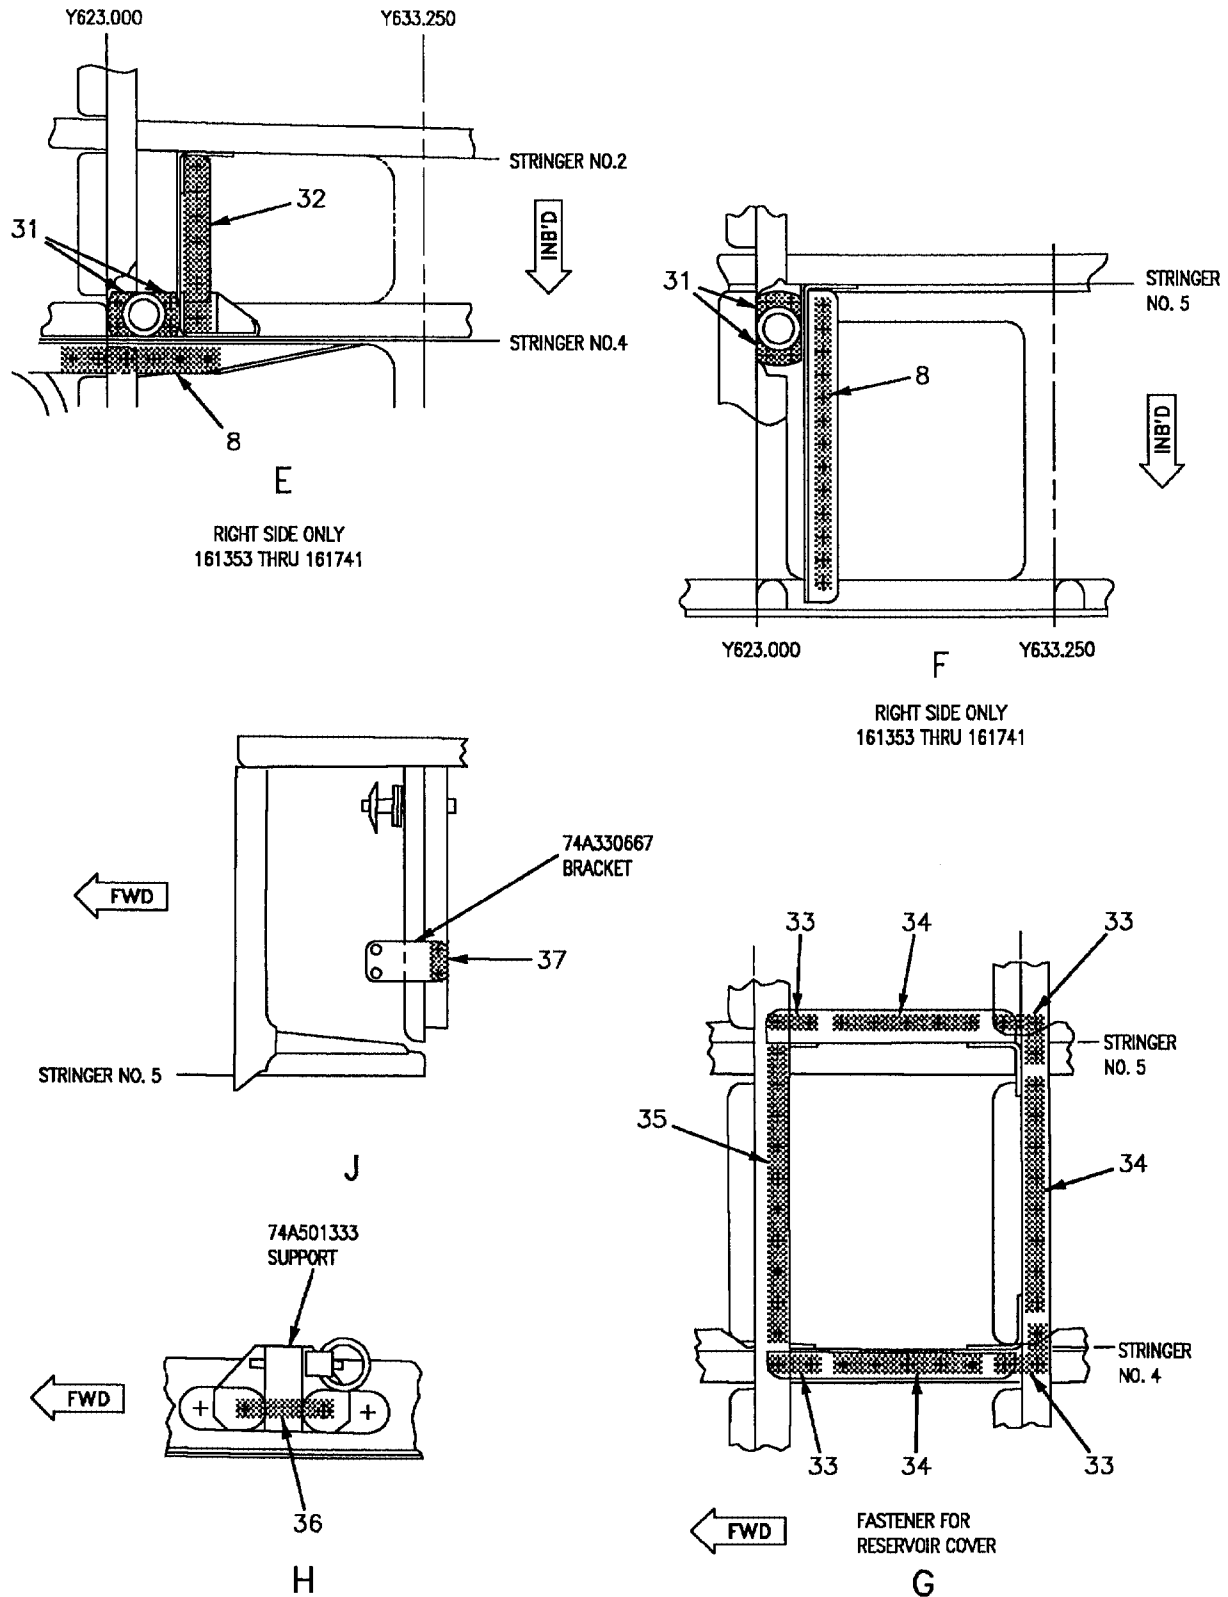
Skin 74A330622, Replacement (Sheet 4)
